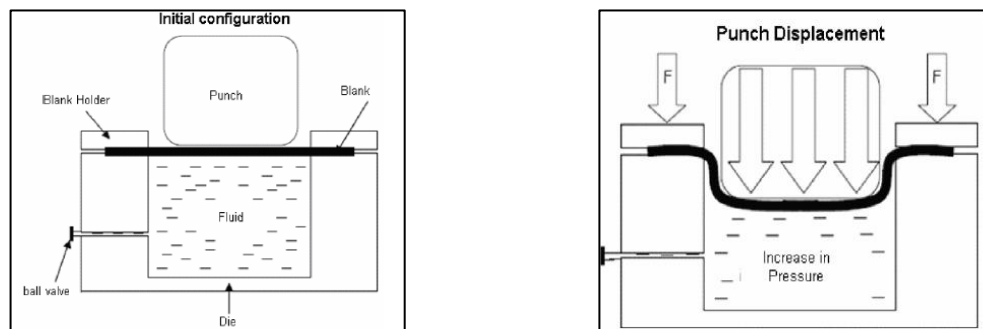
Hydro Mechanical Deep Drawing Process (a) Initial configuration (b) Punch Displacement
